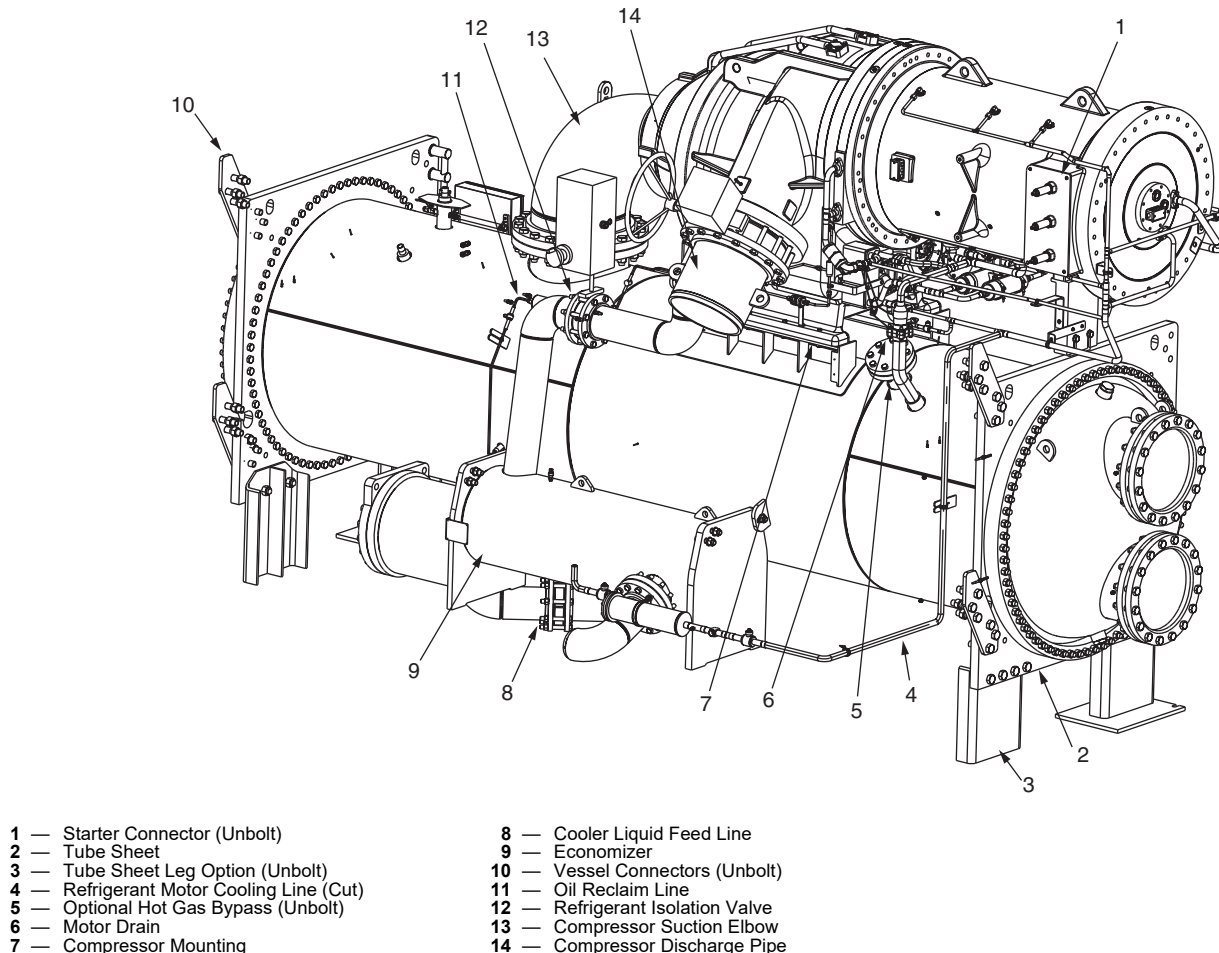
Cooler, Side View (Compressor Frame Size 6 Shown), 19XR6/7
